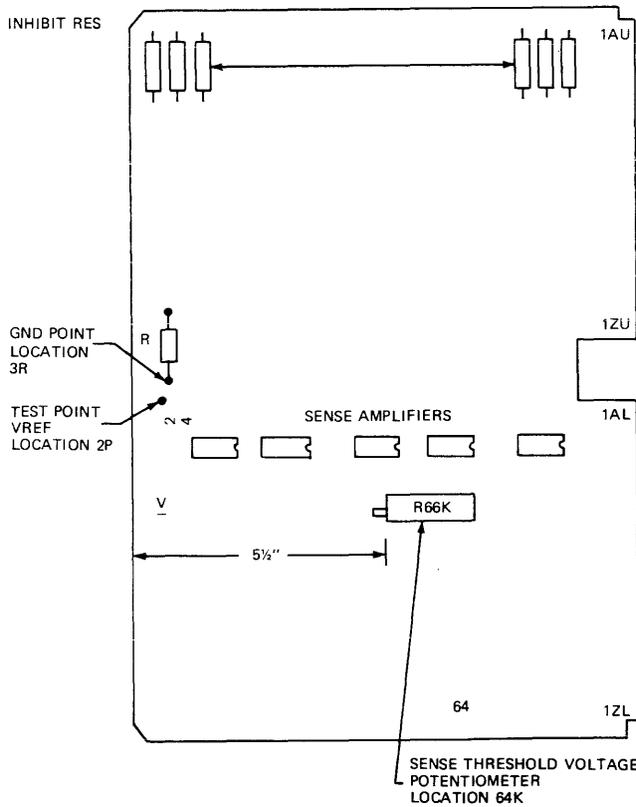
DIGIT BOARDS TEST AND ADJUSTMENT POINTS
